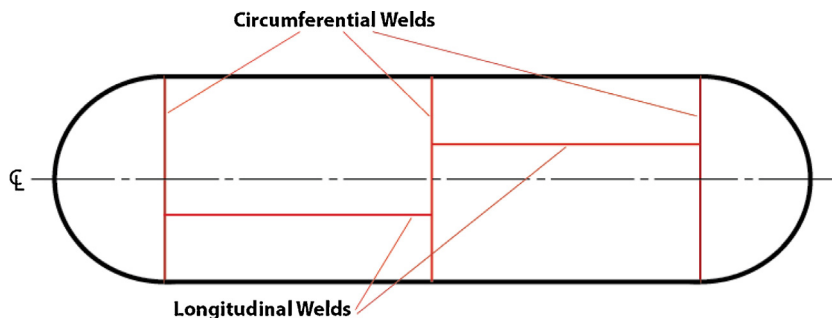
Locations of circumferential and longitudinal welds in nurse tanks.
